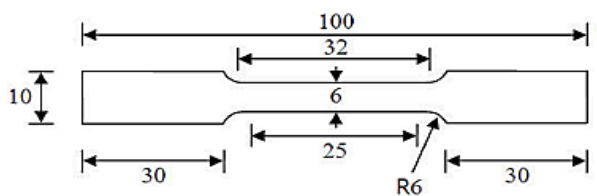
Tensile specimen for AA 6061 aluminium alloy (all dimensions for specimen in millimeters)
